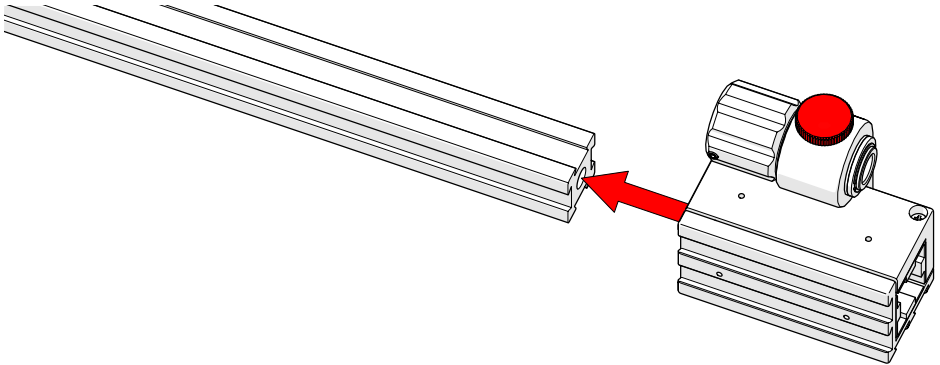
Place slider on frame bar and loosen slider lock knob
